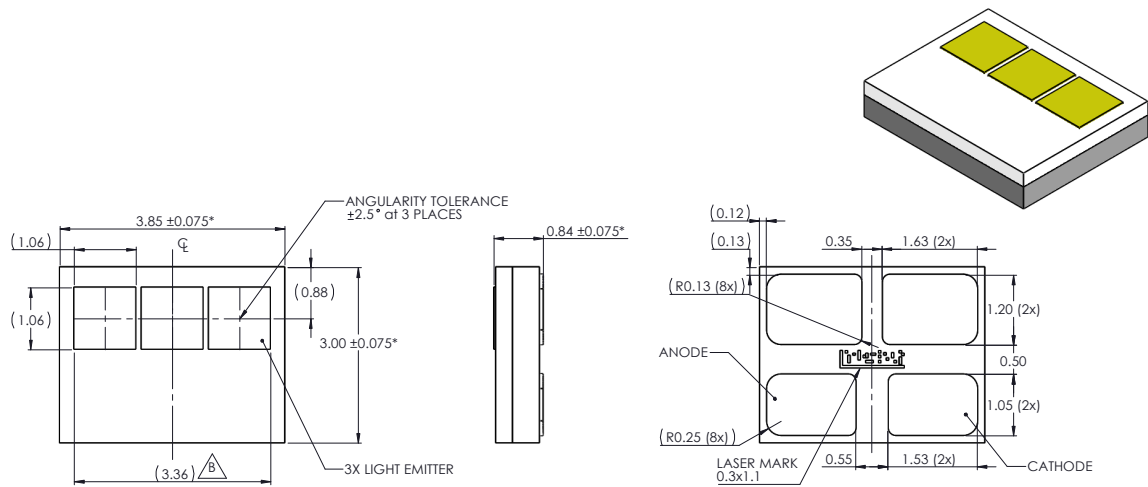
Mechanical dimensions for LUXEON Altilon SMD 1x3.
